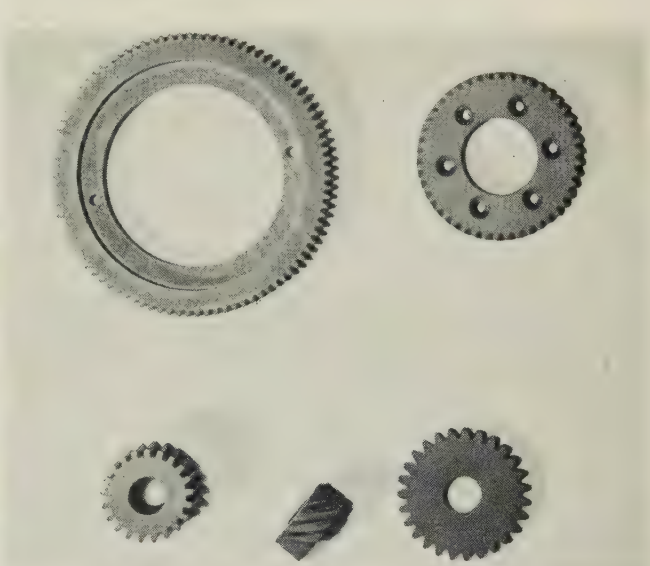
Shock-Resistant, Silent Gear Wheels (Fabric-Laminated Phenolic Plastic). By courtesy of Tufnol, Ltd.
